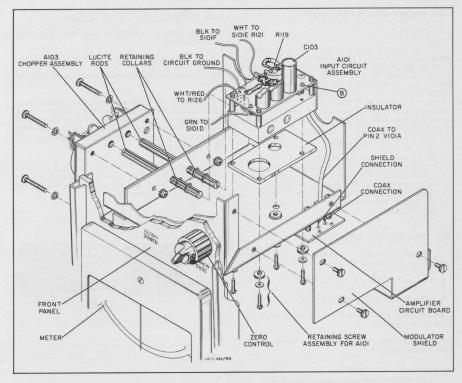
Exploded View, Showing Disassembly for Modulator Replacement
